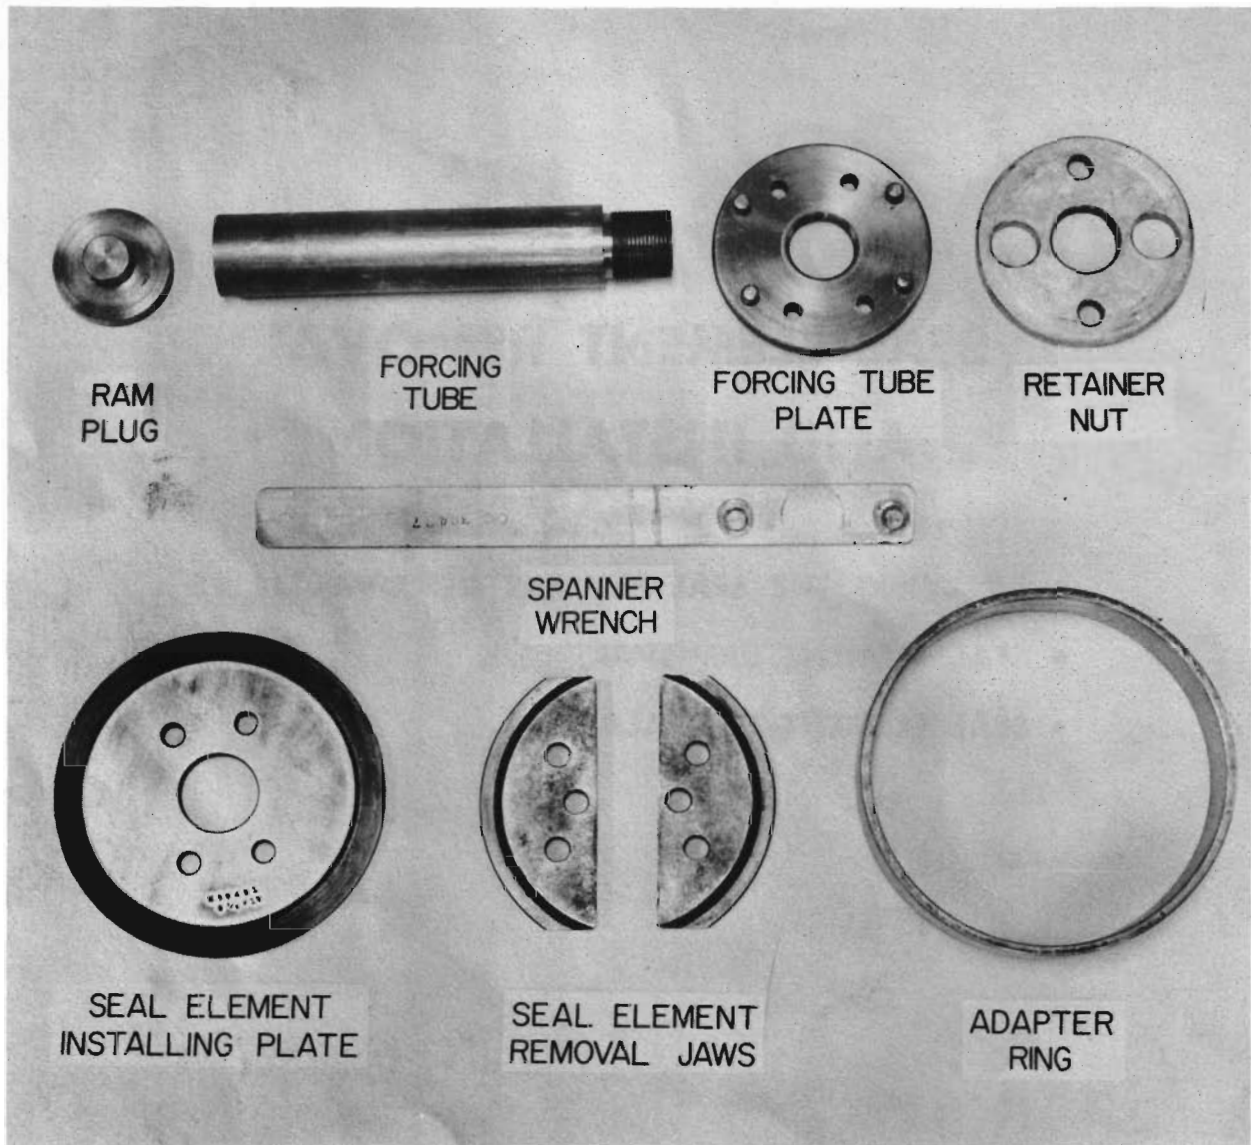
Tools Required for Removing or Installing the Seal Element with a Small Press.
